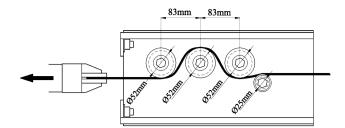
Illustration of special fixture used to perform cyclic bending in the bars
